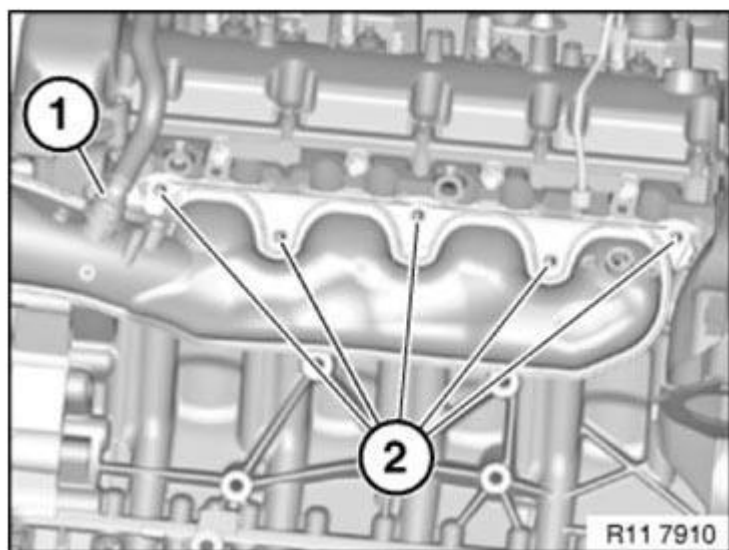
Identifying Engine Ventilation Hose And Nuts
